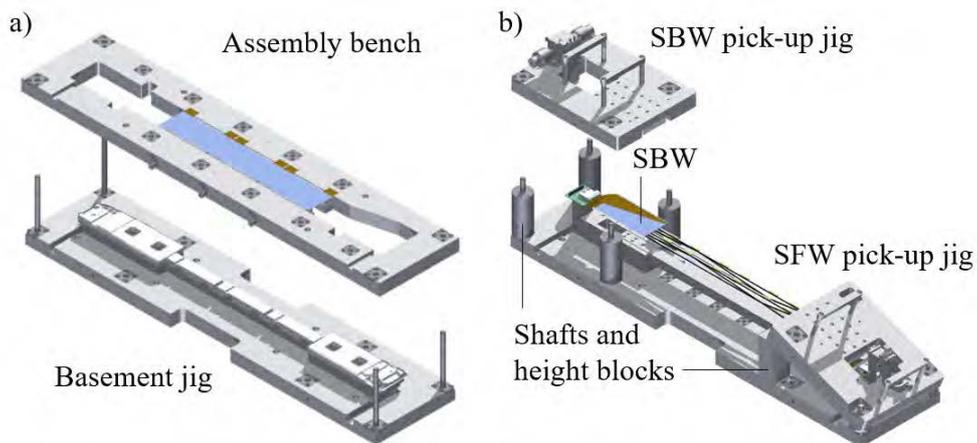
a) assembly bench removed from the basement jig. b) SBW/SFW glued on the RSA.
